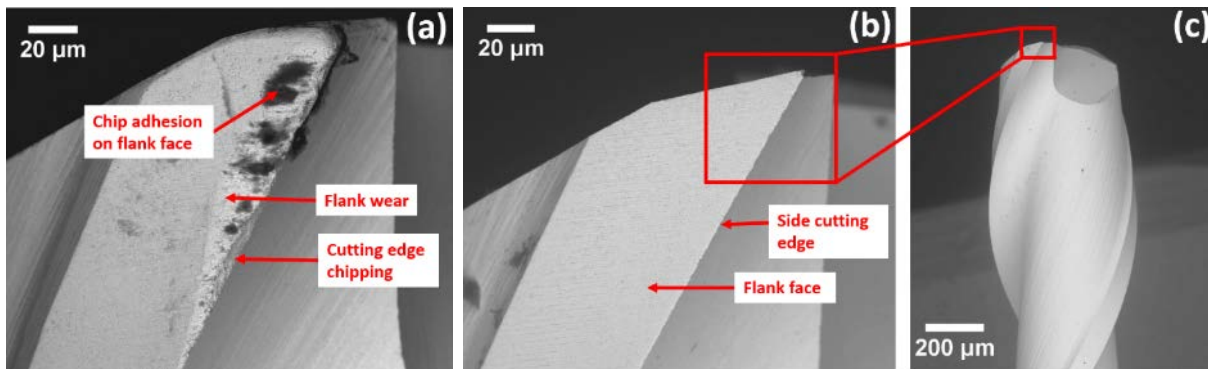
Side view of SEM micrograph for (a) worn tool (Tool #1), (b) & (c) new tool (uncoated endmill).
